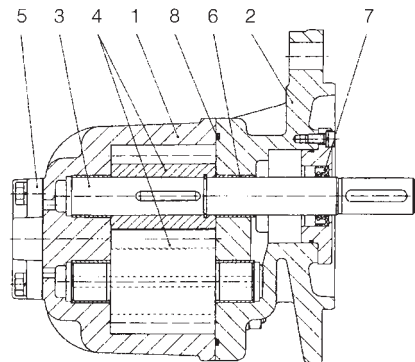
Pump without outboard bearing, special code 197 (with shaft-end sealing)
